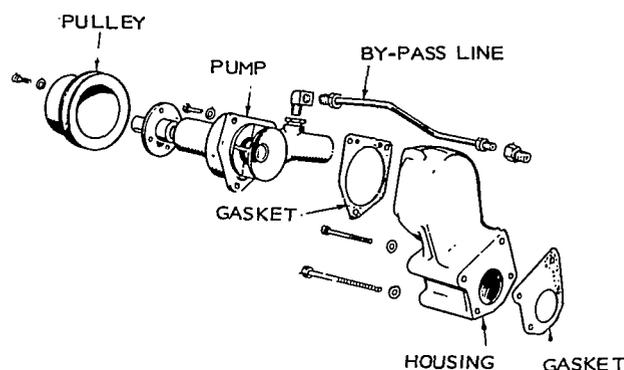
WATER PUMP—EXPLODED VIEW
